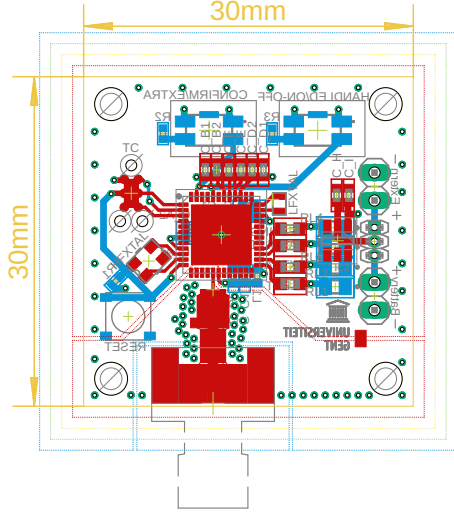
Graphical representation of the developed CN Printed Circuit Board (PCB).
